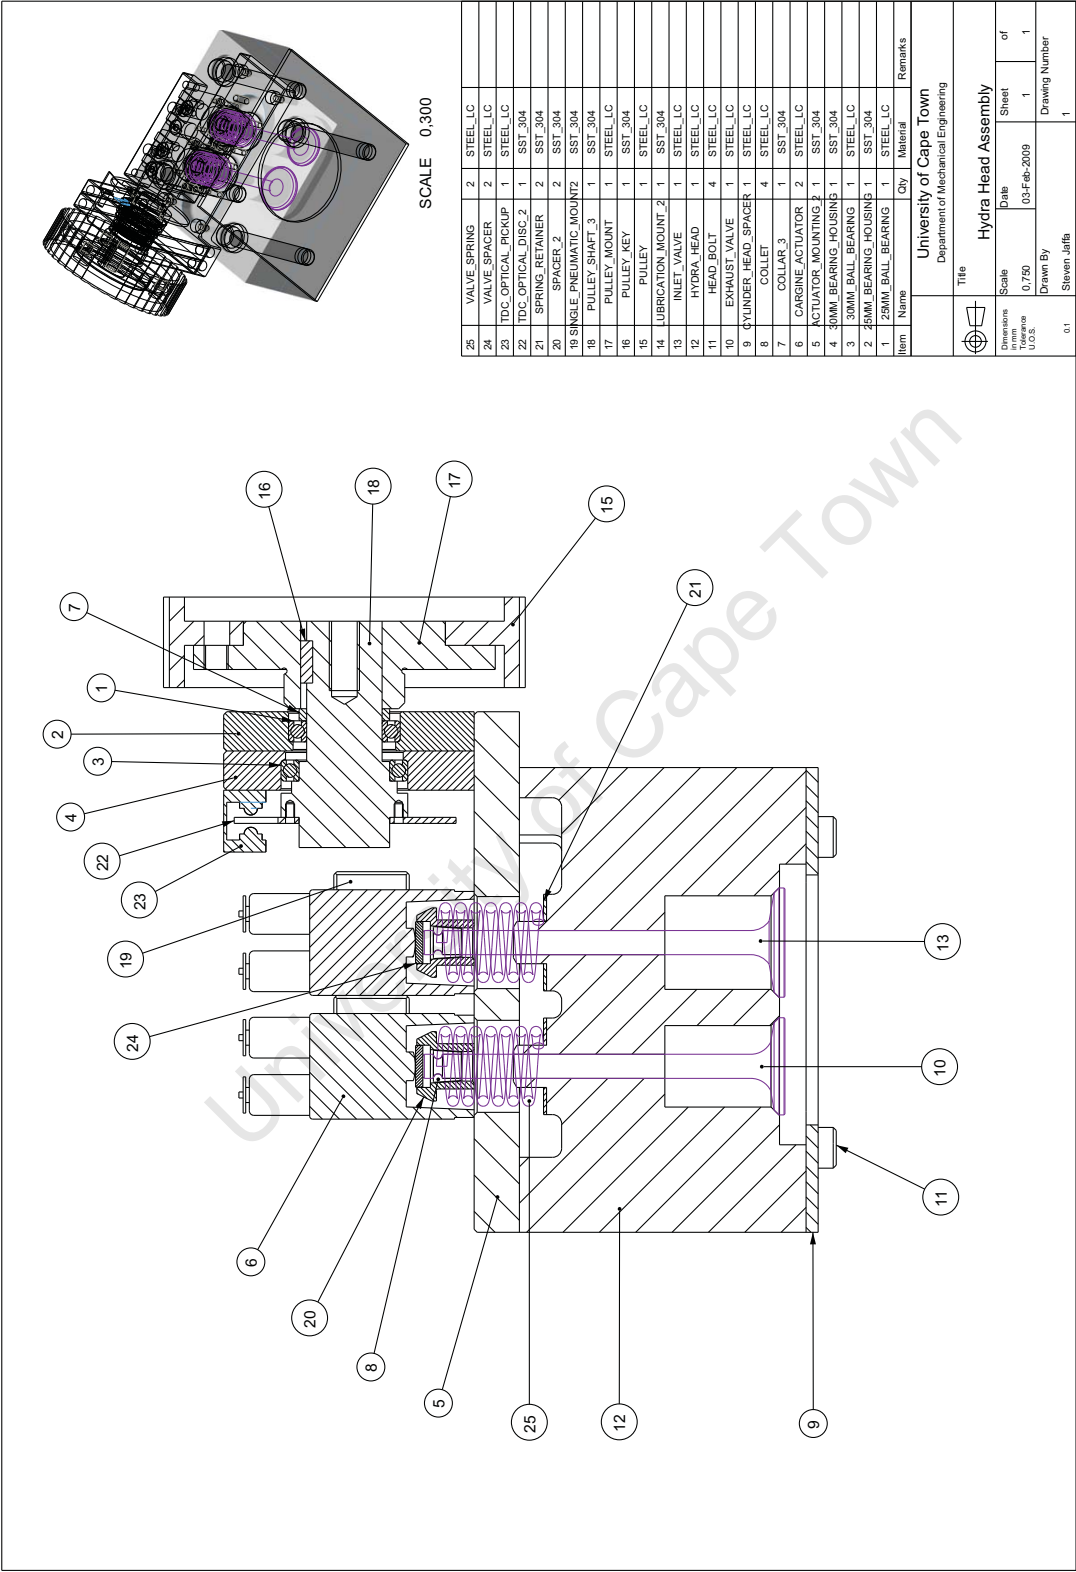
Manufacturing Drawing: Hydra Head Assembly.
